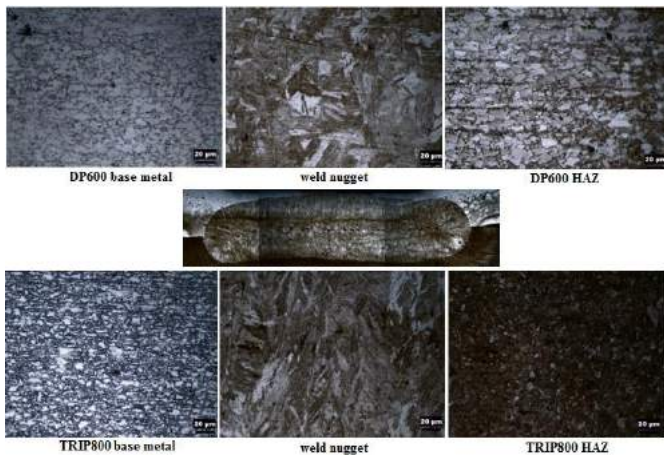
DP600/TRIP800 weldment joined with 4 kN electrode force at 7kA welding current for 20 cycles welding time
